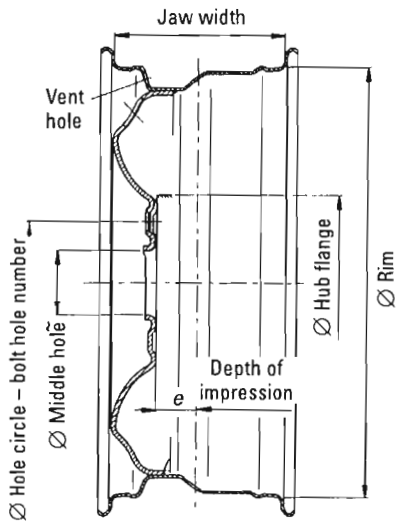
The sheet metal disc-type wheel used in series production vehicles consists of a rim and disc. To avoid fatigue fractures, the wheel hub flange diameter should be greater than the dish contact surface. Wheel offset e (depth of impression) and kingpin offset at ground r_g are directly correlated. A change in e can lead to an increase or a reduction in r_g .
